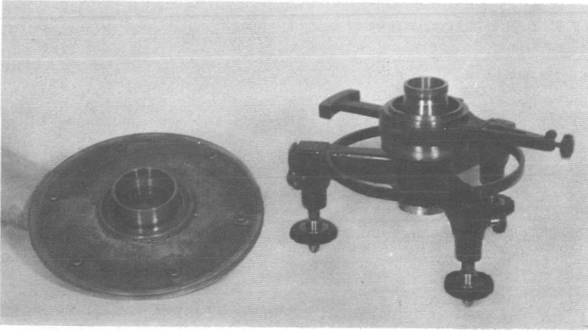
Disassembly of circle bearing, step 3. Hold so as to protect the graduated surface when cleaning and oiling the bearing surfaces.
